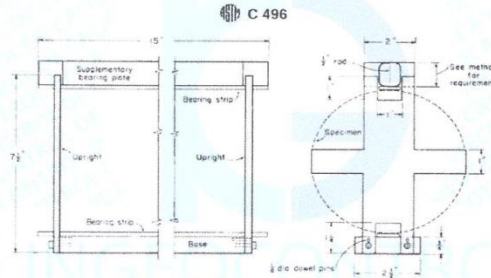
Detailed Plans for a Suitable Aligning Jig
